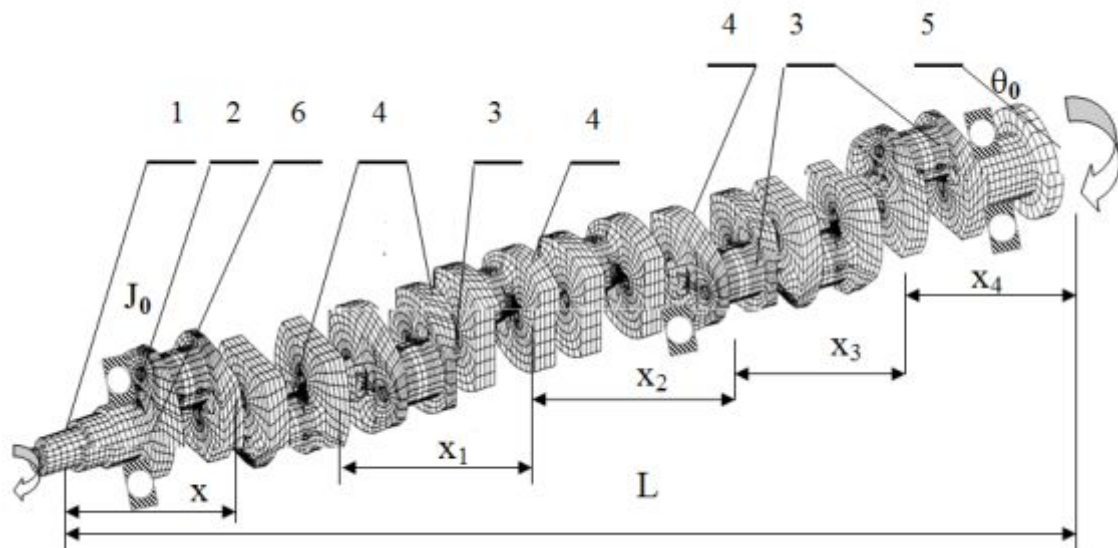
Load diagram of the camshaft: 1 — shank; 2 — bearing; 3 — shaft; 4 — counter weight; 5 — flange; 6 — main shaft journal; 7 — connecting rod journal
